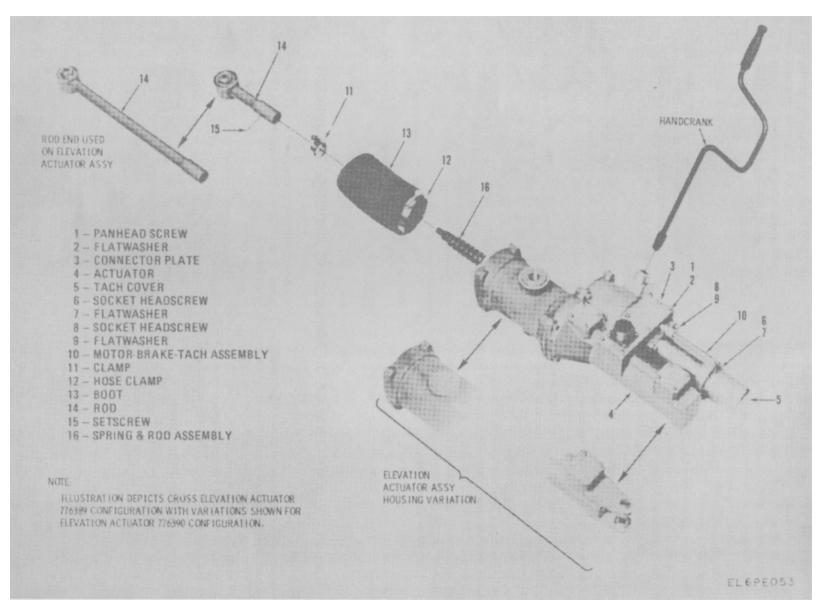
Antenna Actuator, Disassembly View Showing the Motor-Brake-Tachometer.
